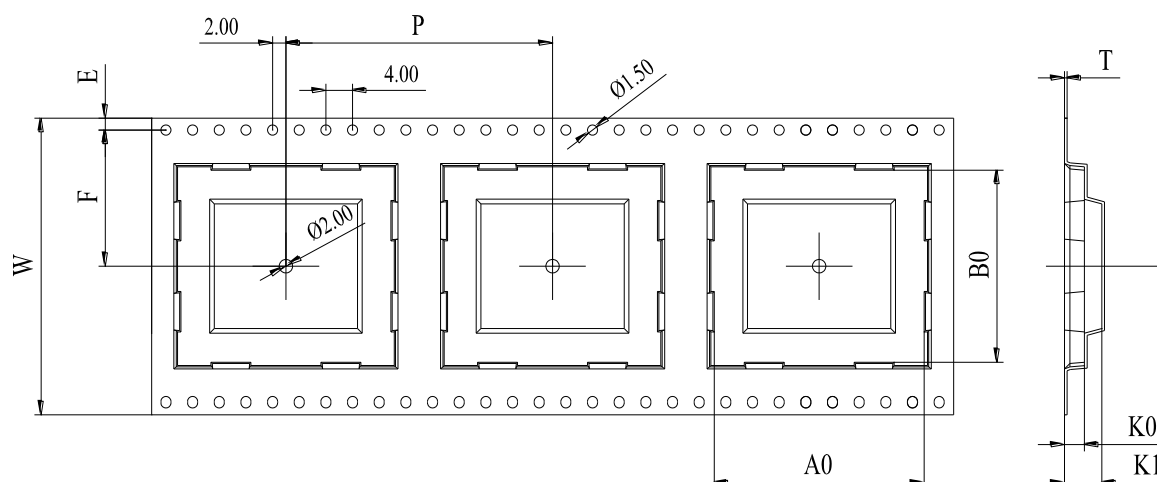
Carrier Tape Dimension Drawing (Unit: mm)
